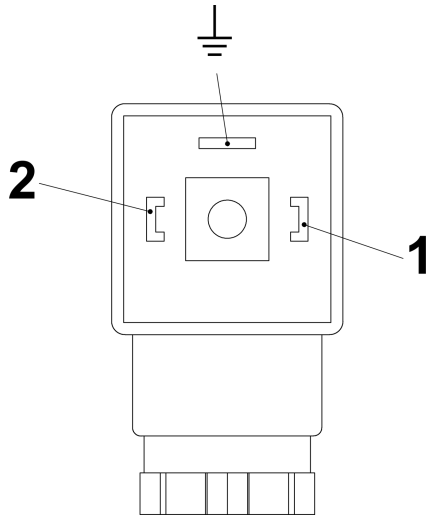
Pin assignment, plug socket, normally-open contact (SG-30 with connector in compliance with EN175301-803)
